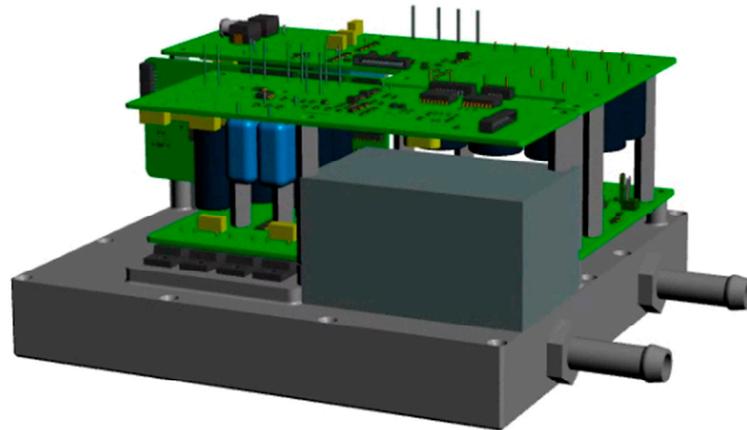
Three-dimensional (3D) assembly drawing of the 3.3 kW onboard charger (OBC) prototype with a heat spreader. The system has two power boards. Lossy parts are on the bottom board and bulky parts are on the top board.
